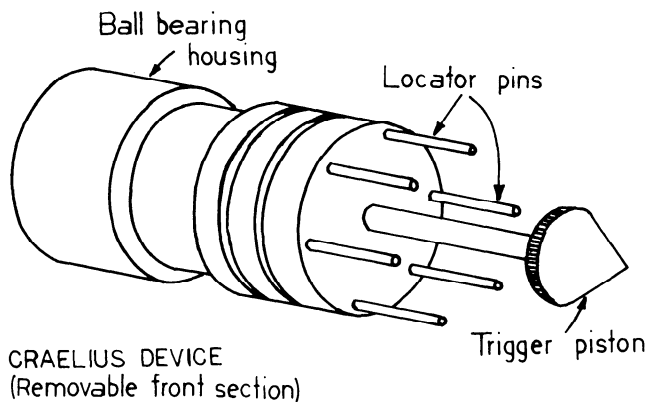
Isometric drawing of Craelius core orienter (after Seegmiller, 1990).
